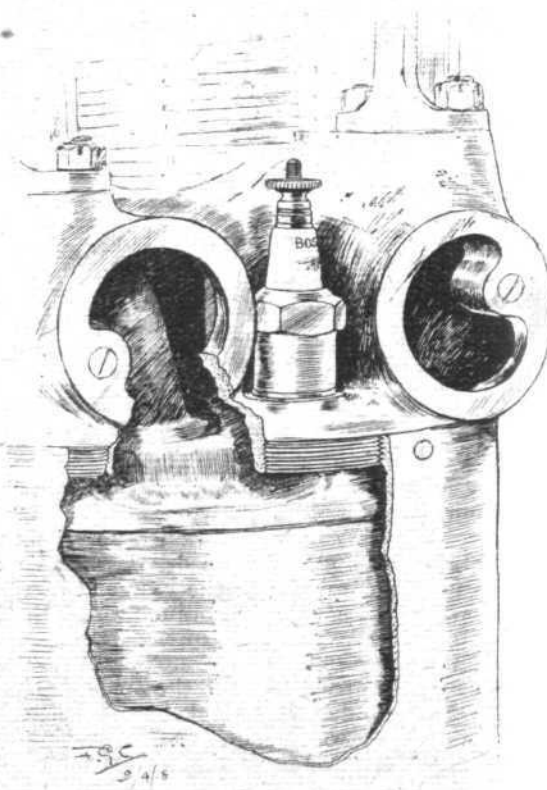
Sketch of cylinder head, showing water passages and connections.
